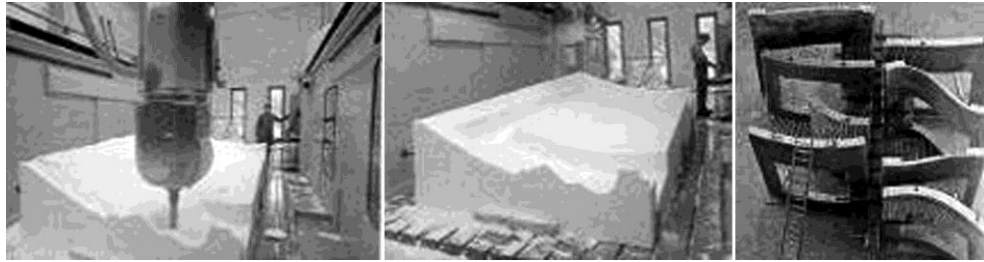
Styrofoam moulds milled by multi-axis milling machine for construction of Zollhof Towers (Afify & Elghaffar, 2007).
